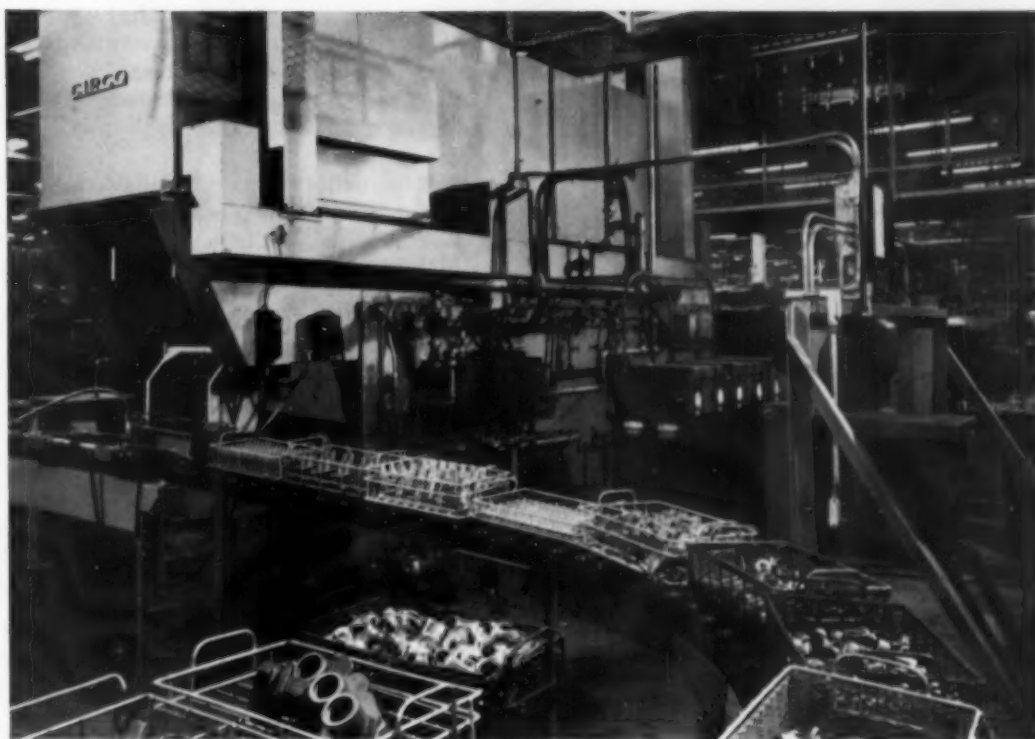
This Ultrasonic System Cleans 1000 lb. of Automobile Steering Assemblies in One Hour
